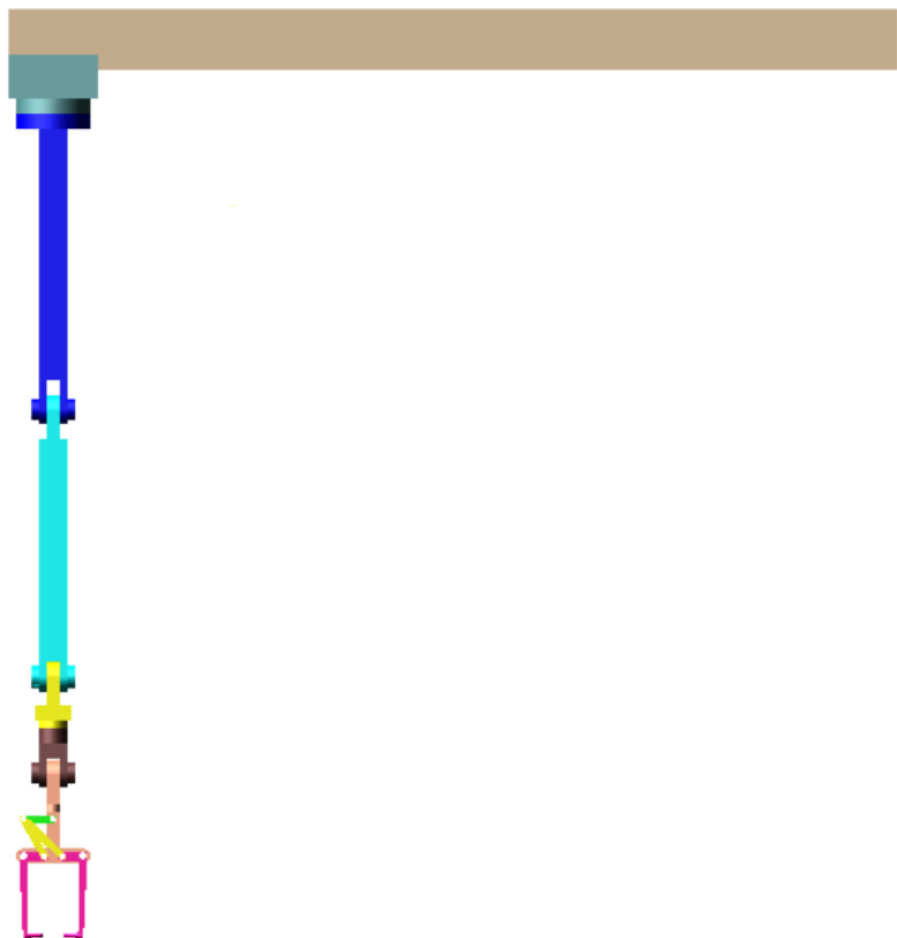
Robotic arm for Spot welding using ADAMS
